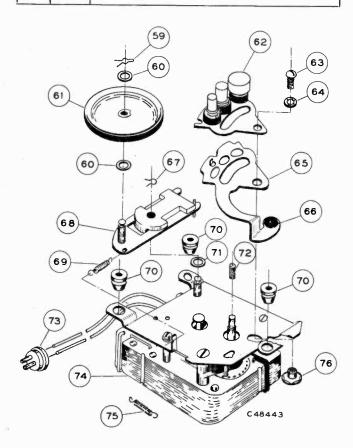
Assembly of Motors Stamped 5046, 5047, 5355 and 5432
